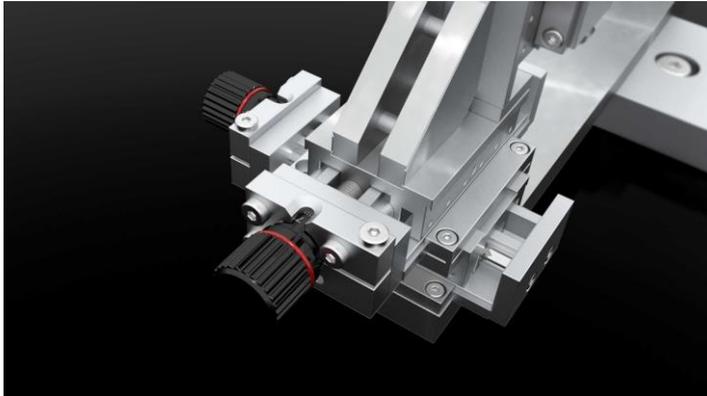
IEF-Werner constructed a unit with three slides. Because of the scarce space conditions, the slides can be clamped directly to the spindle.
